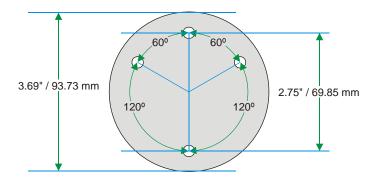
VX6 RAM Bracket - Mounting Dimensions (Not To Scale)
